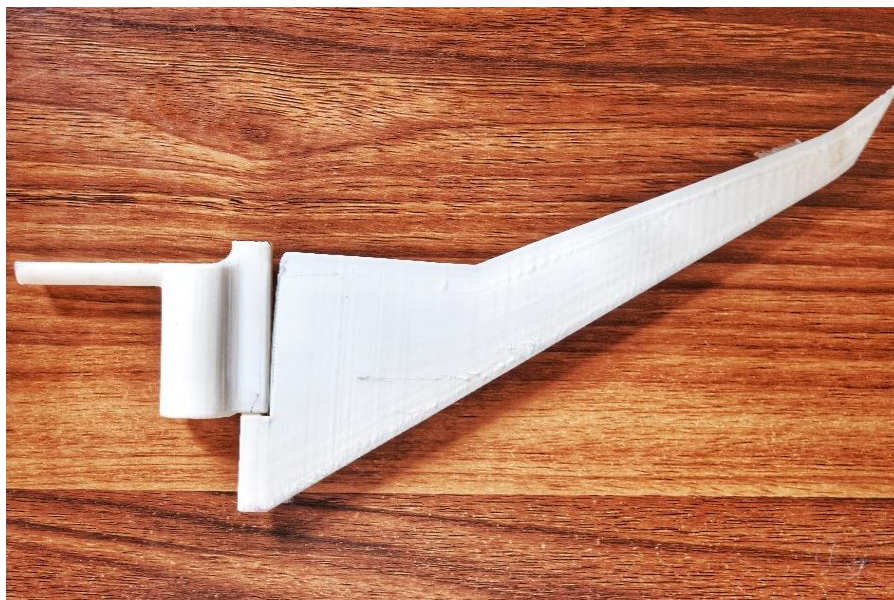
3D printed Boeing 787-800 single wing with Base mount.
